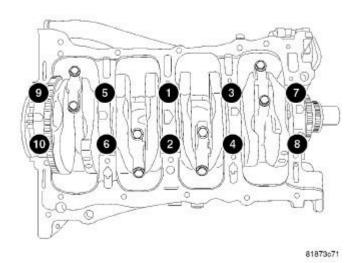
Main Bearing Cap Removal/Tightening Sequence Courtesy of CHRYSLER GROUP, LLC
